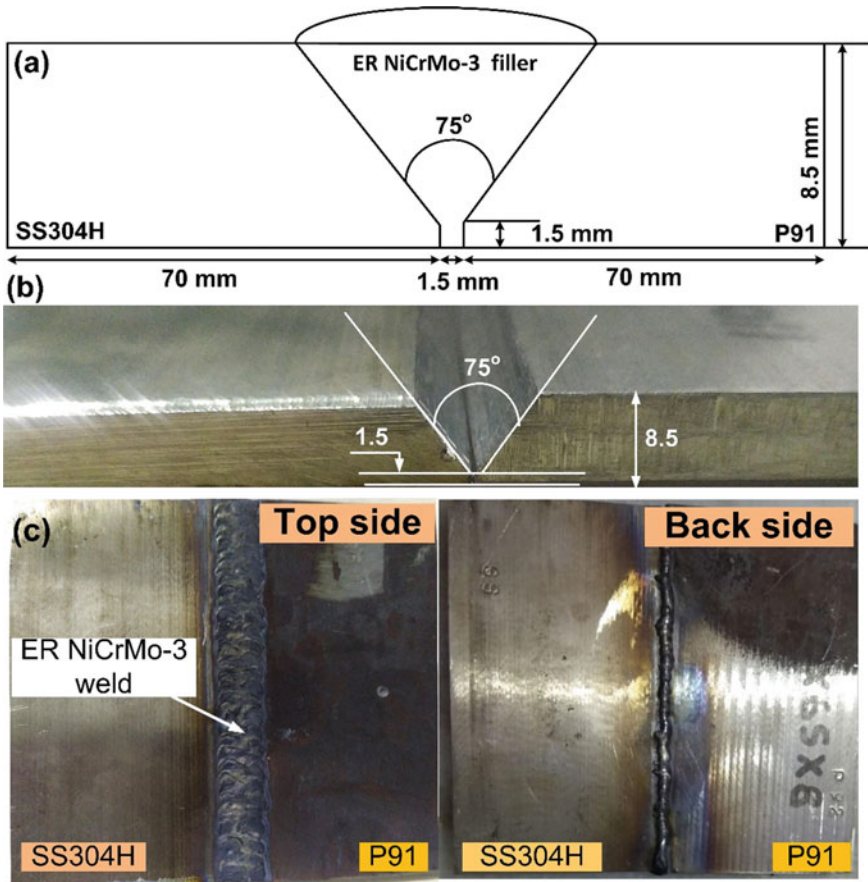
a Groove details, b plate after machining the groove, c top and back side of the welded plate
